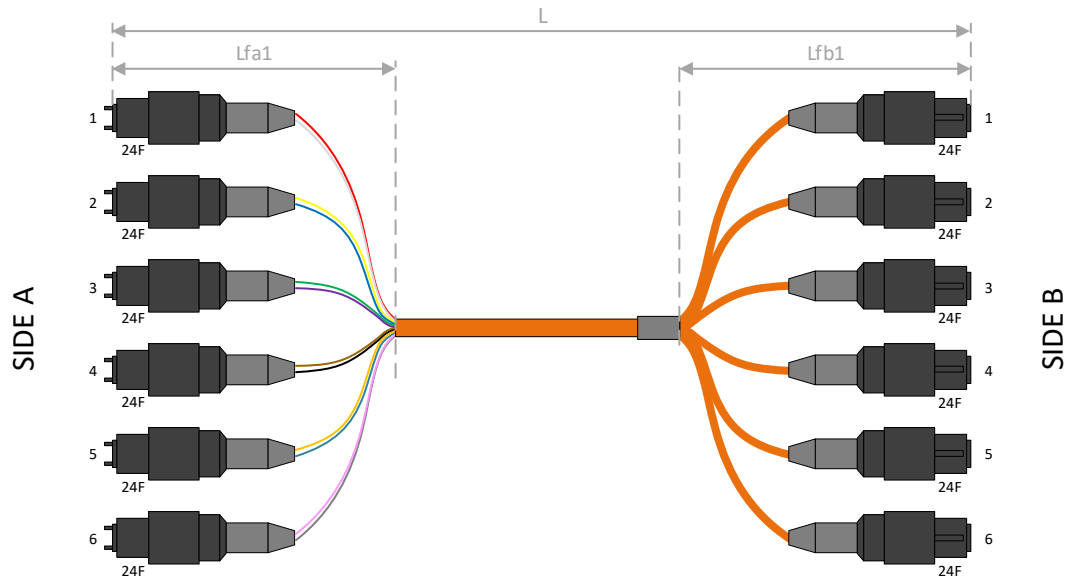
Example of trunk cable with 6 single branches of 24 fibres. Side A is of breakout type while side B is of fan-out type.
